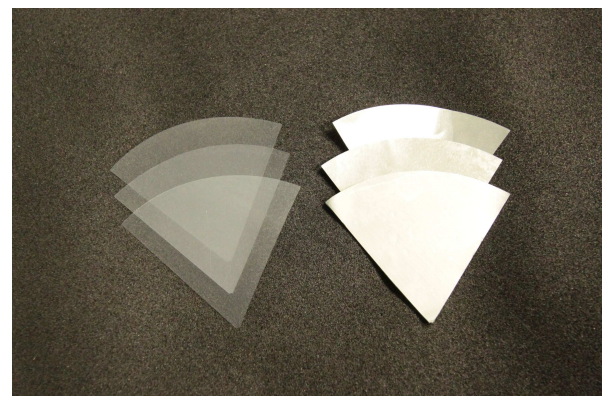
Examples of Mylar and aluminum foils machined with the correct shape for the production of the cones.
